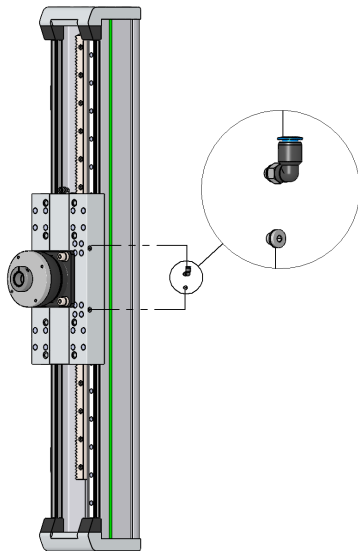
Position of the pneumatic connection, 2x clamping or braking element, order code D and E
